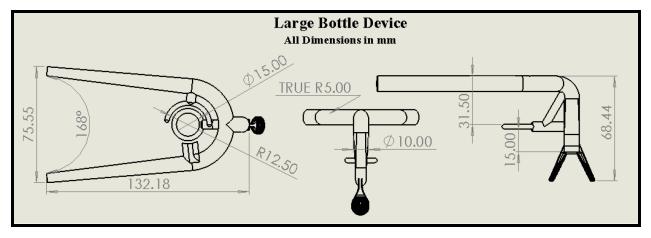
SolidWorks drawing showing dimensions of the Large Bottle Device.
